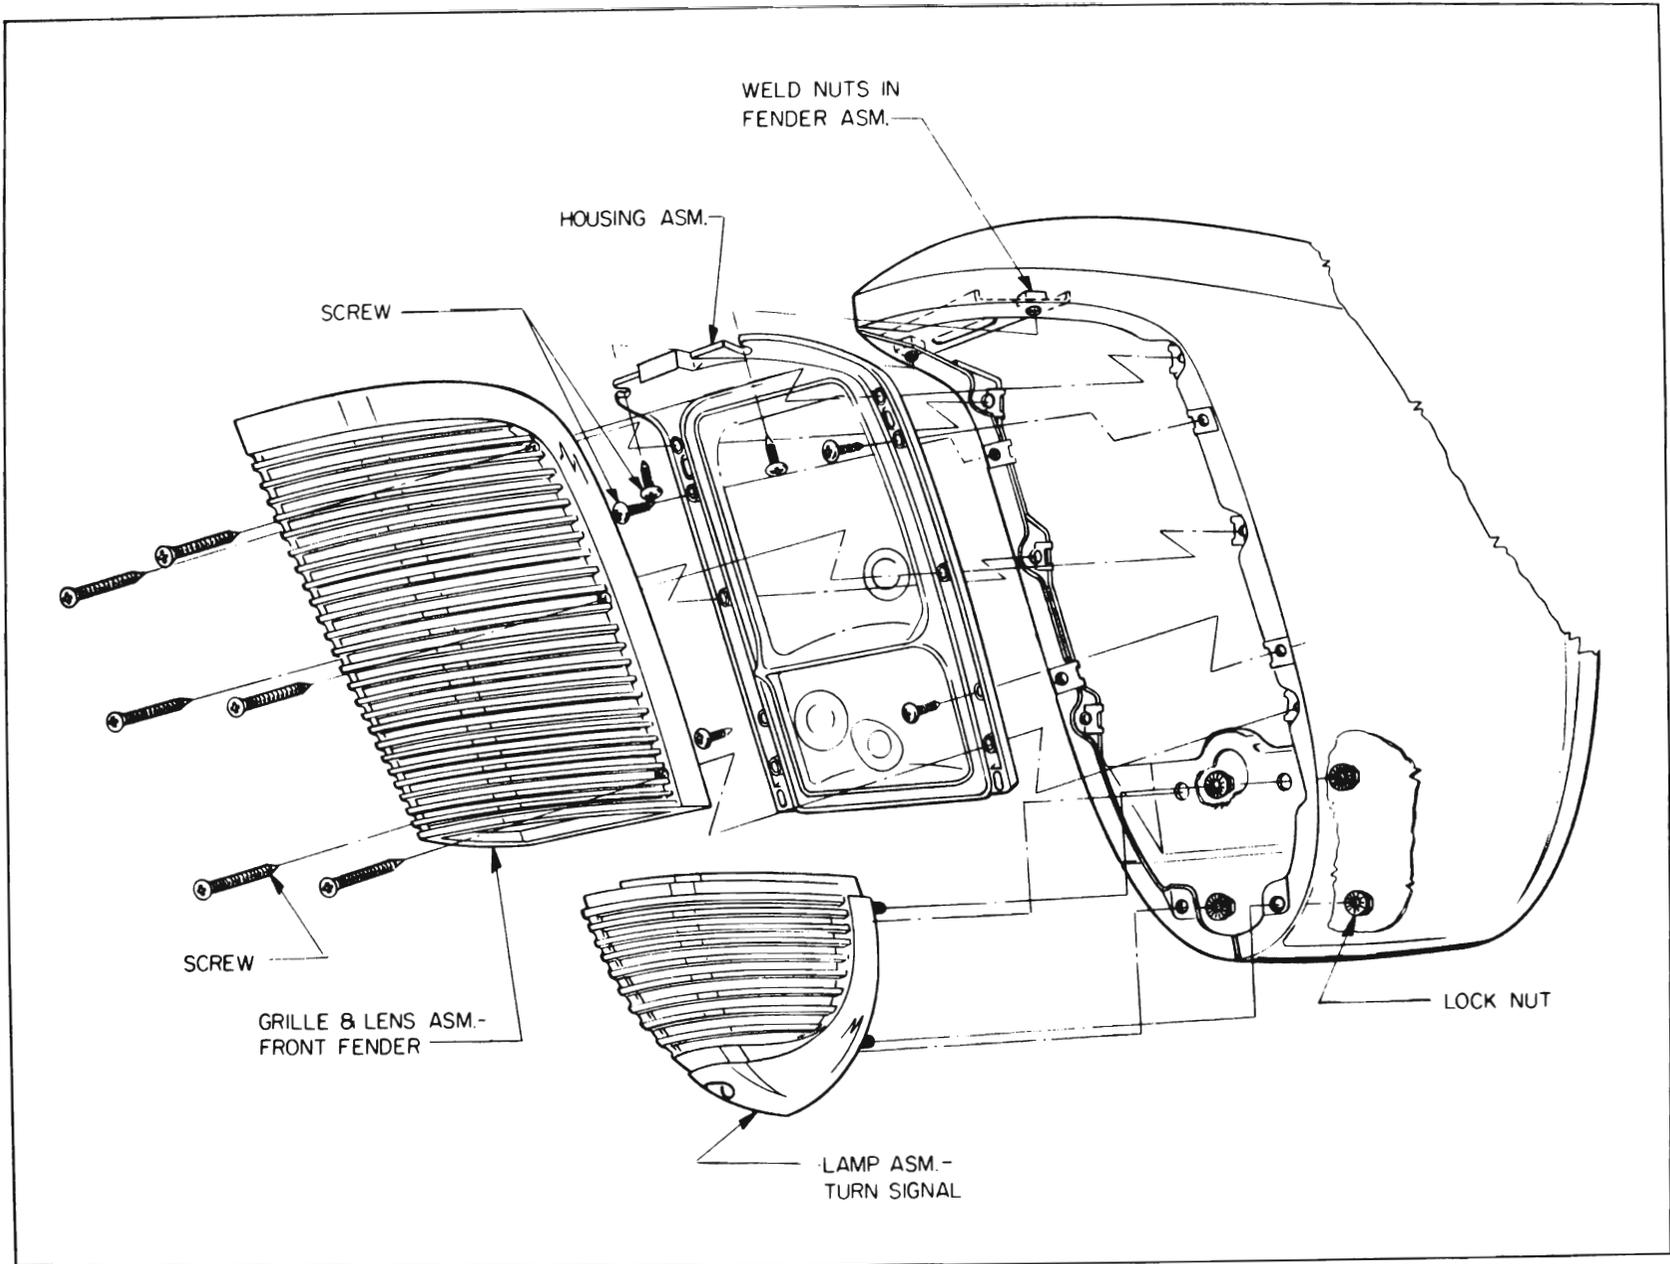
Parking Lamp, Cornering Light, & Directional Signal Grille Assembly—4700 Series
